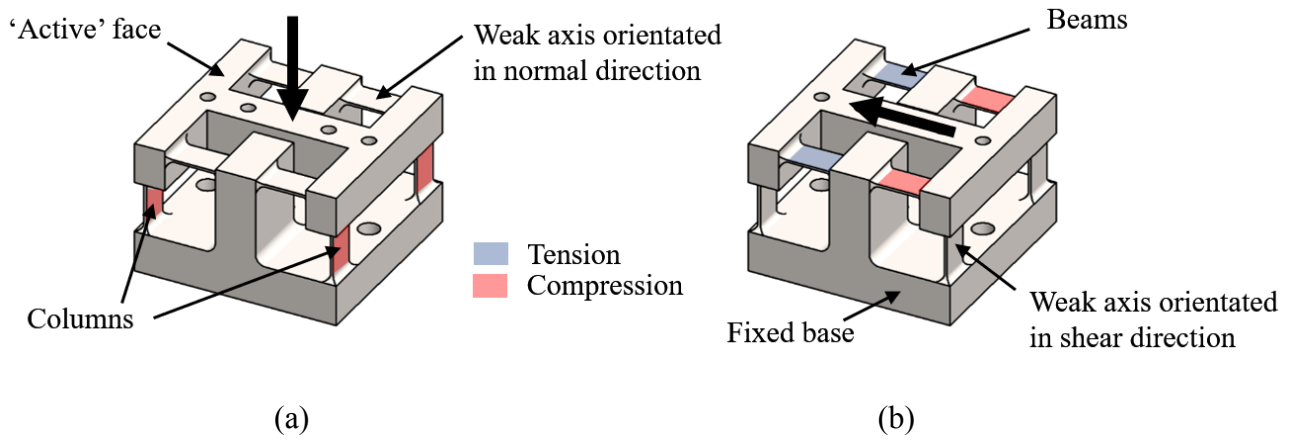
Beam-column force sensor proposed in [58] showing primary locations of tension and compression in the beams and columns under (a)  $F_z$  loading and (b)  $F_x$  loading
